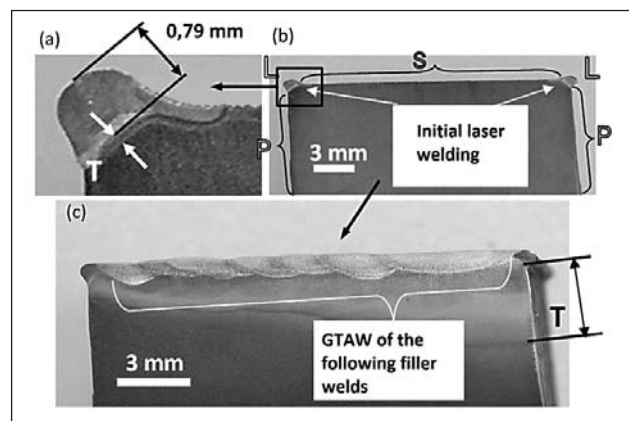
Refurbishment of worn out surface (S) on die casting die with a) and b) LBW and filling of the surface using GTAW. a) weld made by laser, b) a macro specimen made of two laser weld (L), c) macro specimen of a completely remanufactured surface (laser and GTAW), T - HAZ, L - LBW, P - highly polished surface
